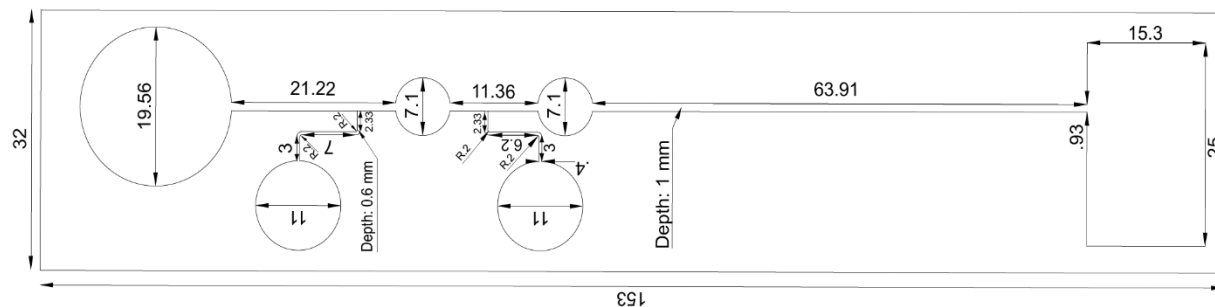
Engineering drawing of nitrite testing device. Units in mm.
